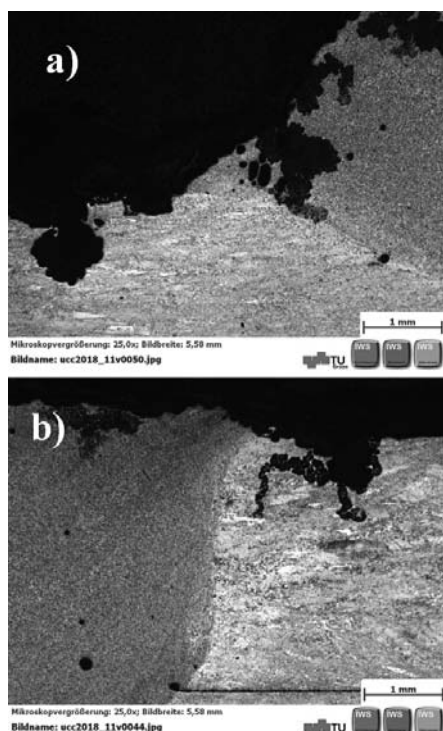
Welded AZ31 joint, grinded – cross sections in LOM/corrosion after the 480 h NSS test: a) lower weld edge; b) upper weld edge – strong corrosion of the AM50 weld metals and the base metal
